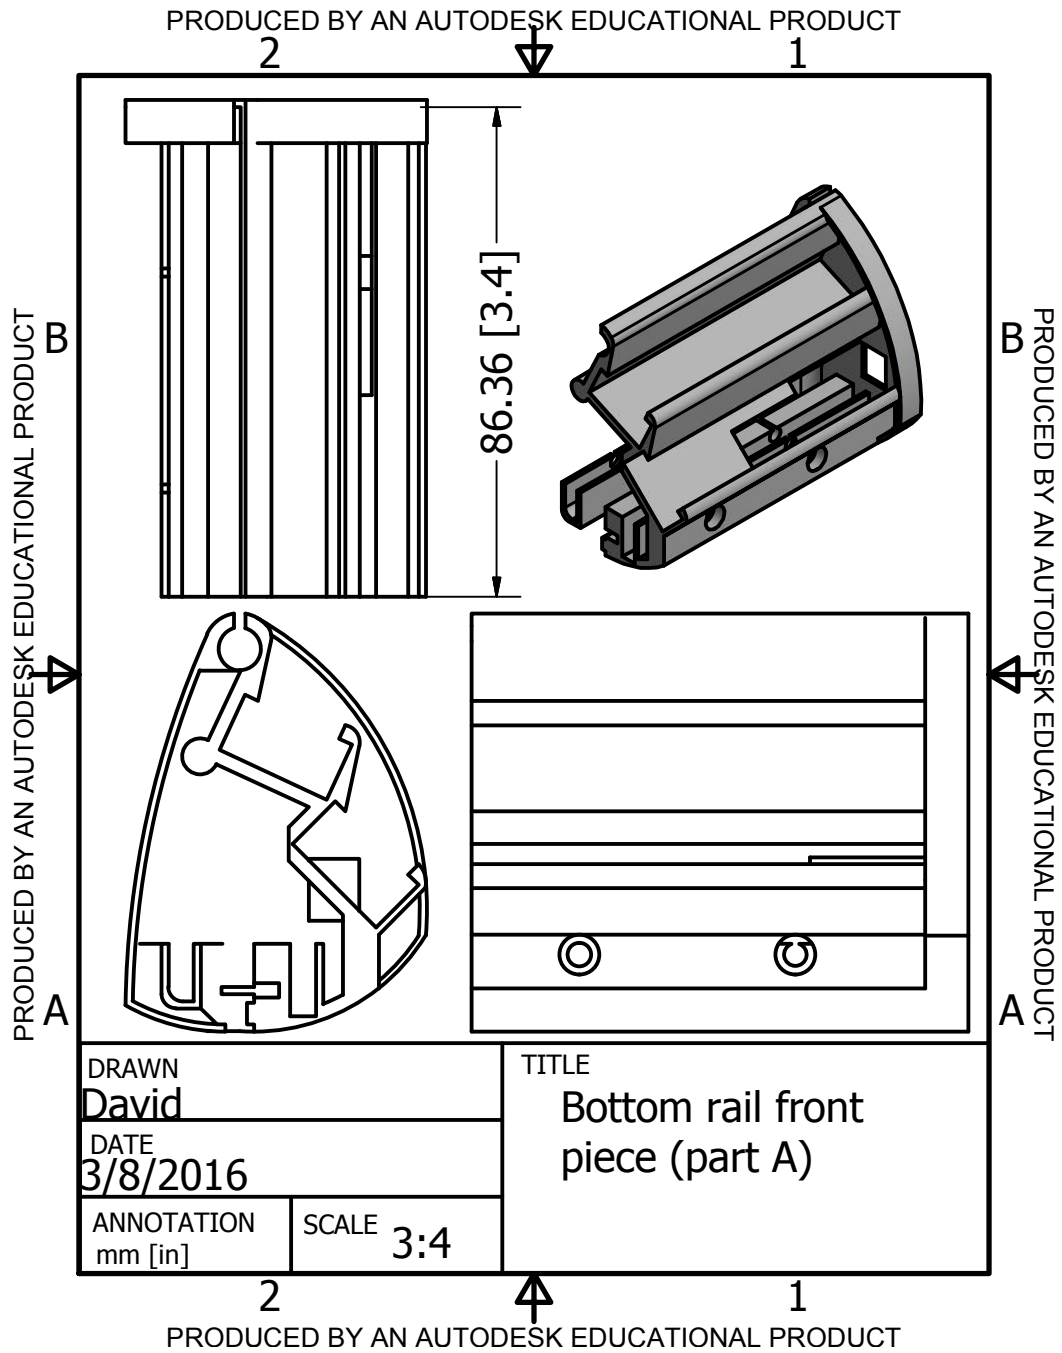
Mechanical drawing for the front piece of the bottom rail for the side that accepts wall adapter power and requires additional clearance for a PCB.
